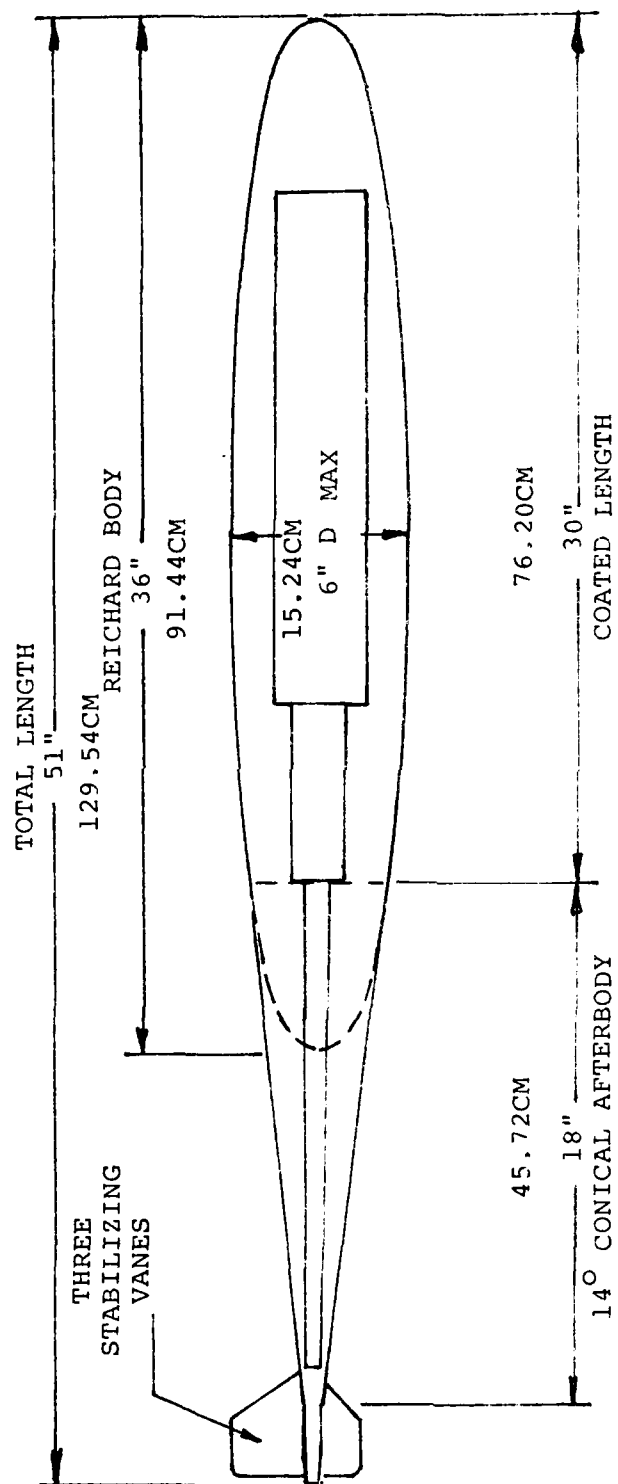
MOLDED POP-UP BODY FOR COATING TESTS RIGID BODY DIMENSIONS
